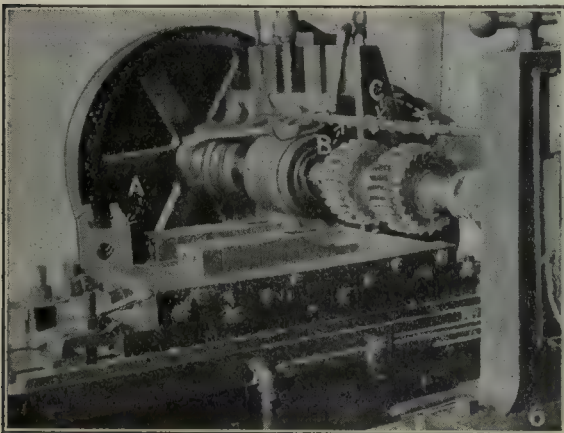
MILLING CHIP GROOVE AND BEVELED ENDS OF DIE BLANK
